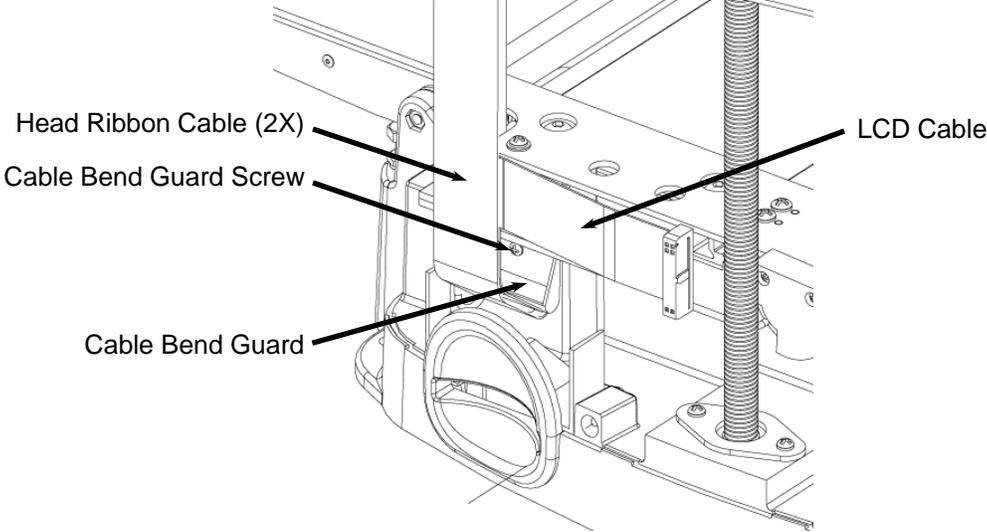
REMOVING THE BOTTOM RIBBON CABLE BEND GUARD
